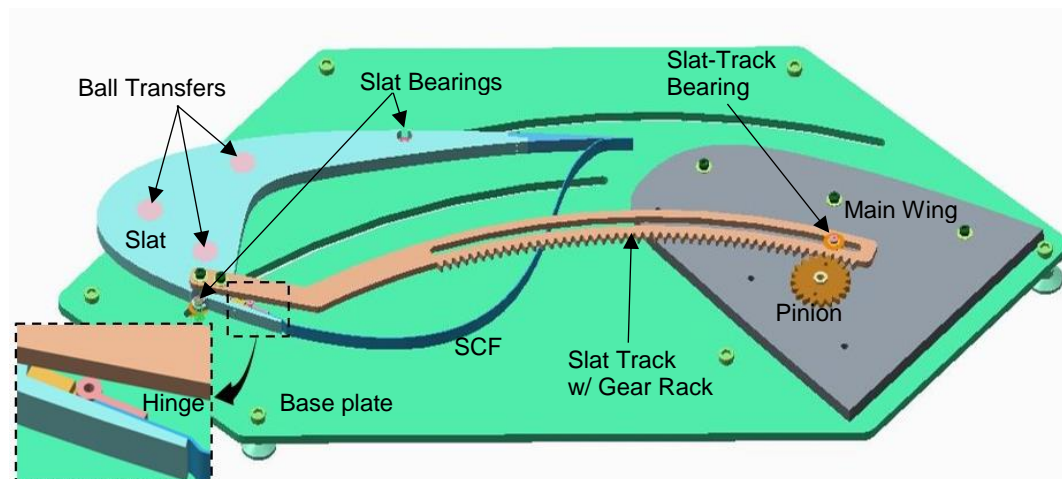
CAD model for the mechanized SCF benchtop model. Inset shows close-up of hinge.
